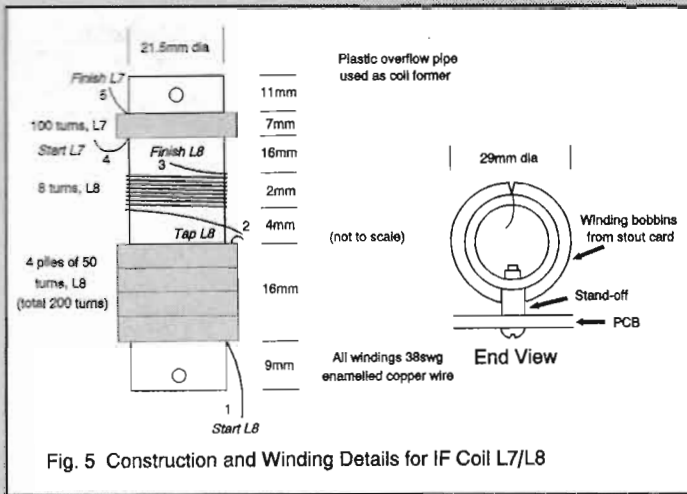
Construction and Winding Details for IF Coil L7/L8
